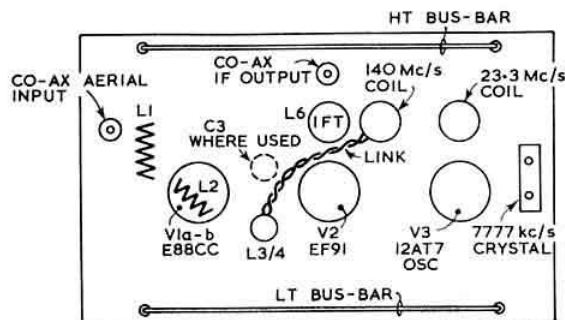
A suggested mechanical layout for "The Quickstarter."
